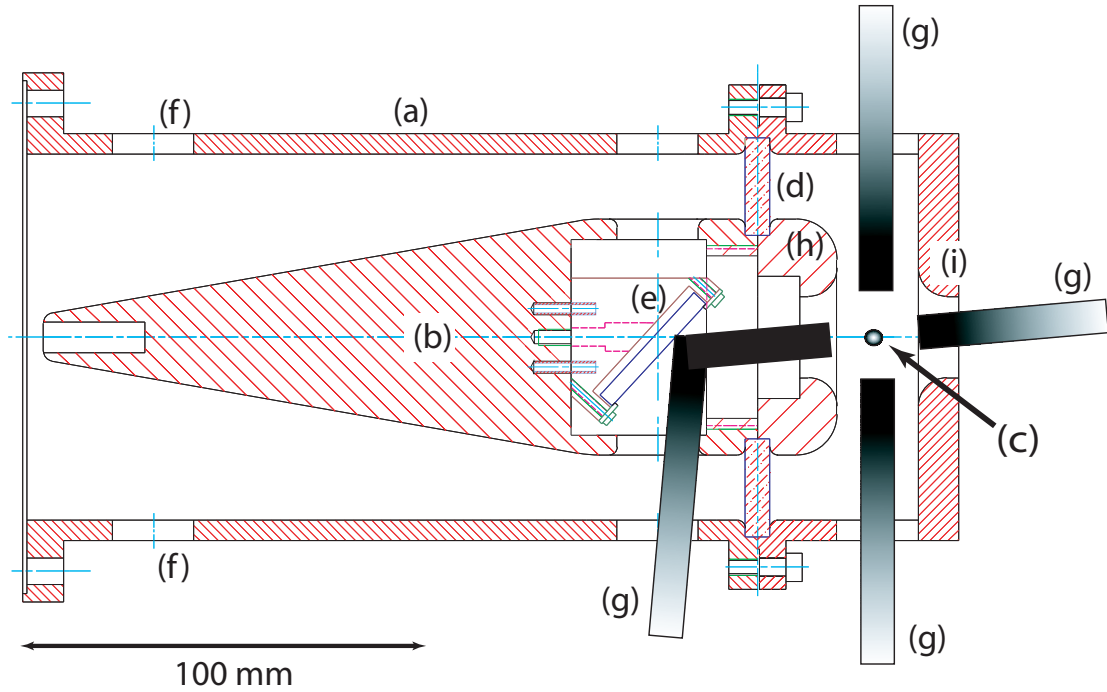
Technical drawing of the accelerator (cross-section): (a) outer conductor; (b) inner conductor; (c) acceleration point; (d) glass ring; (e) mirror; (f) pumping holes; (g) laser beams; (h) radius of curvature on the inner conductor R_i ; (i) radius of curvature at the acceleration point R_a .
